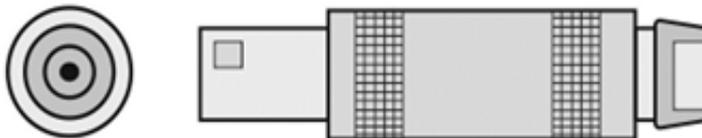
PZT connector, LEMO FFS.00.250.CTCE24, front view
